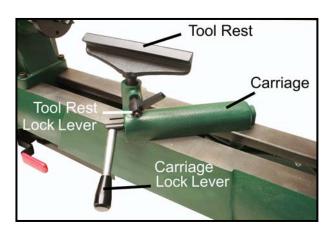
Adjusting Carriage & Tool Rest on the Bed
